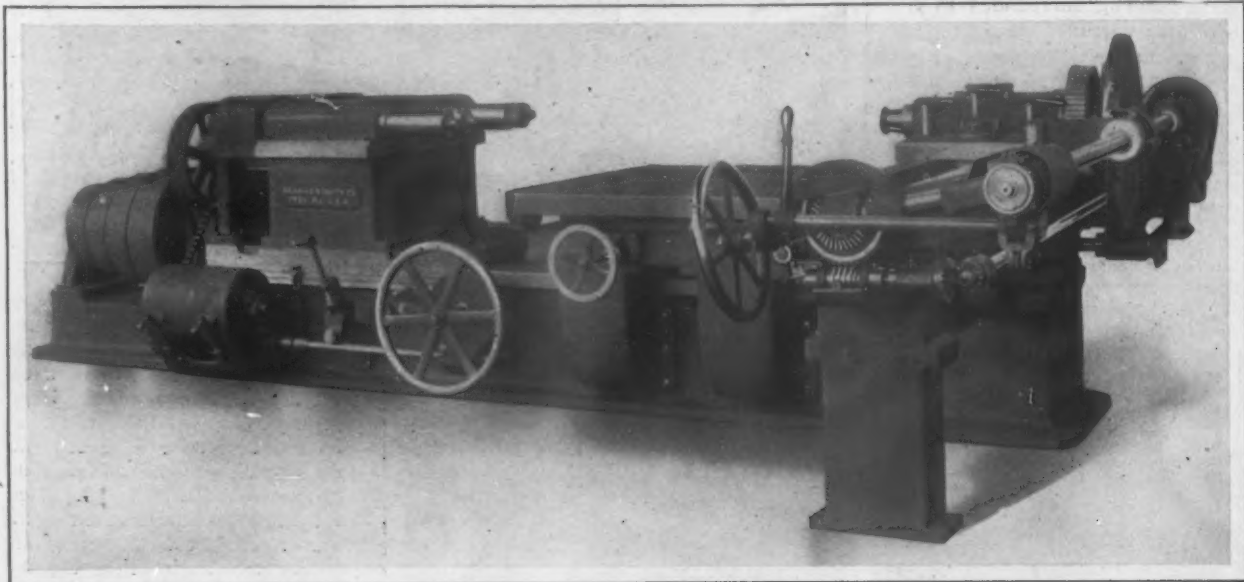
The No. 2 Universal Cylinder Boring and Milling Machine Built by the Beaman & Smith Company, Providence, R. I.
